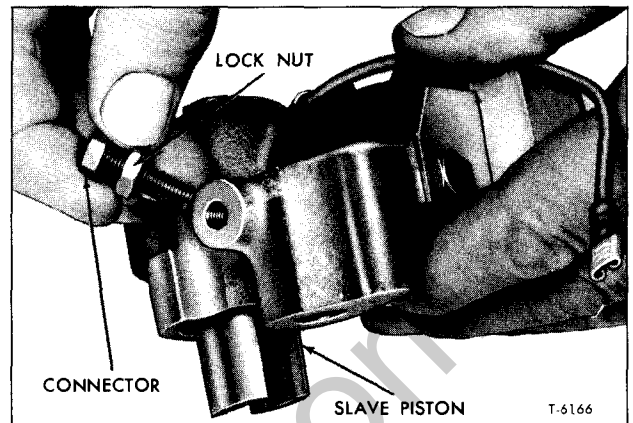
Installing Oil Connector in Housing (Prior to Housing Installation)
